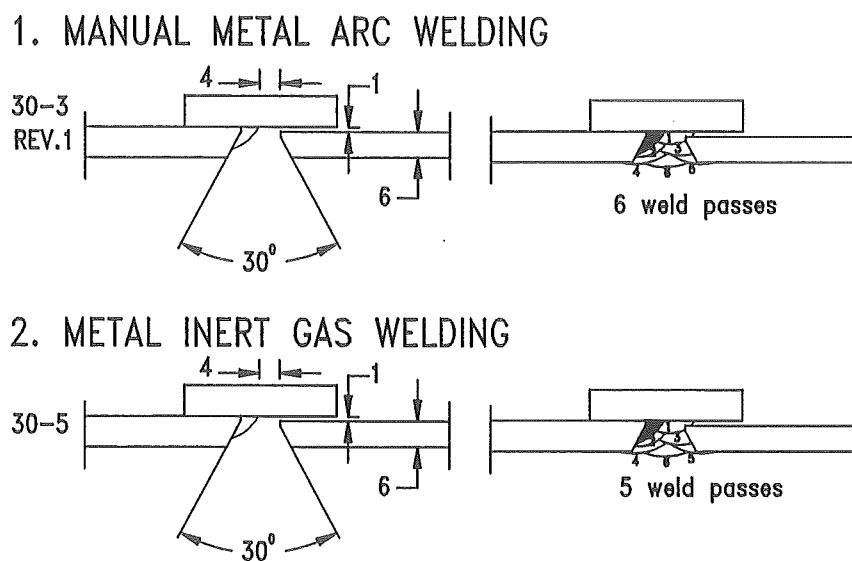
Weld procedure specification - edge preparation and bead sequence.
